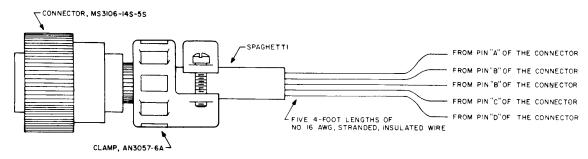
Fabricated cable for the BEARING INDICATOR, construction details.
